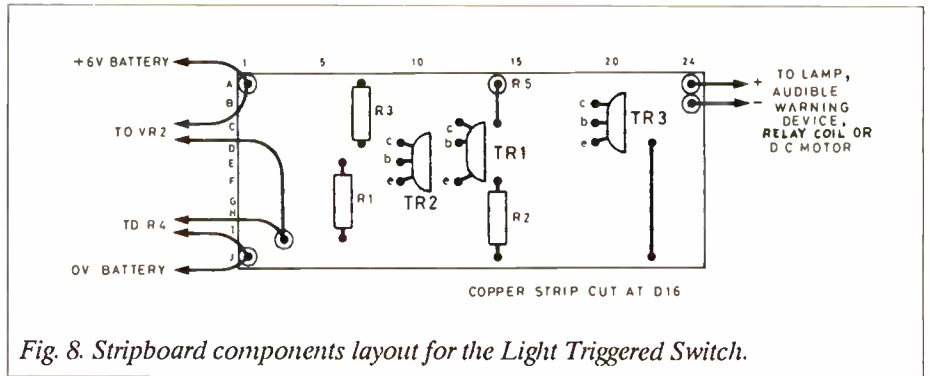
Stripboard components layout for the Light Triggered Switch.
